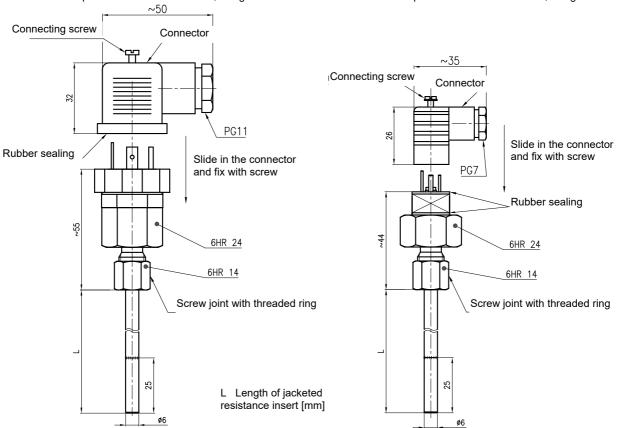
DIMENSIONAL DRAWING DESIGN F
